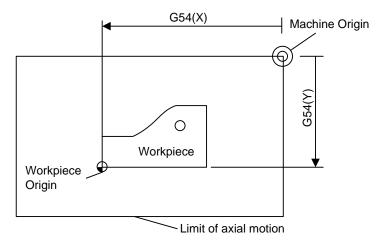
The relationship of workpiece offset and machine coordinate system
